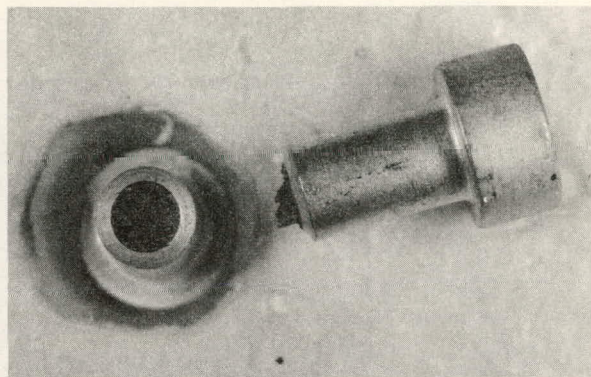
Fracture Surface of 212-B Notched Specimen X (High Charge, Unirradiated); Stress-Rupture Test
